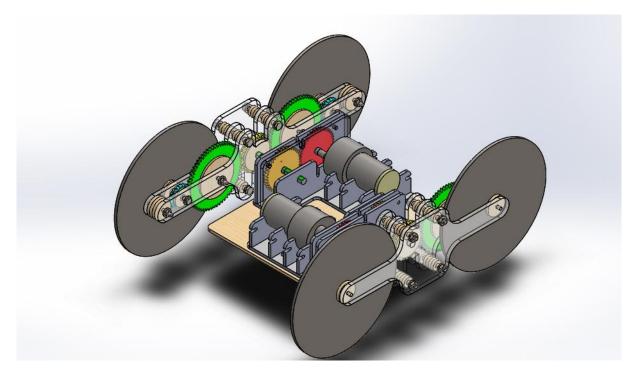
Isometric view of Mark 1 assembly (transparent gearbox upright to show gearbox gears).
